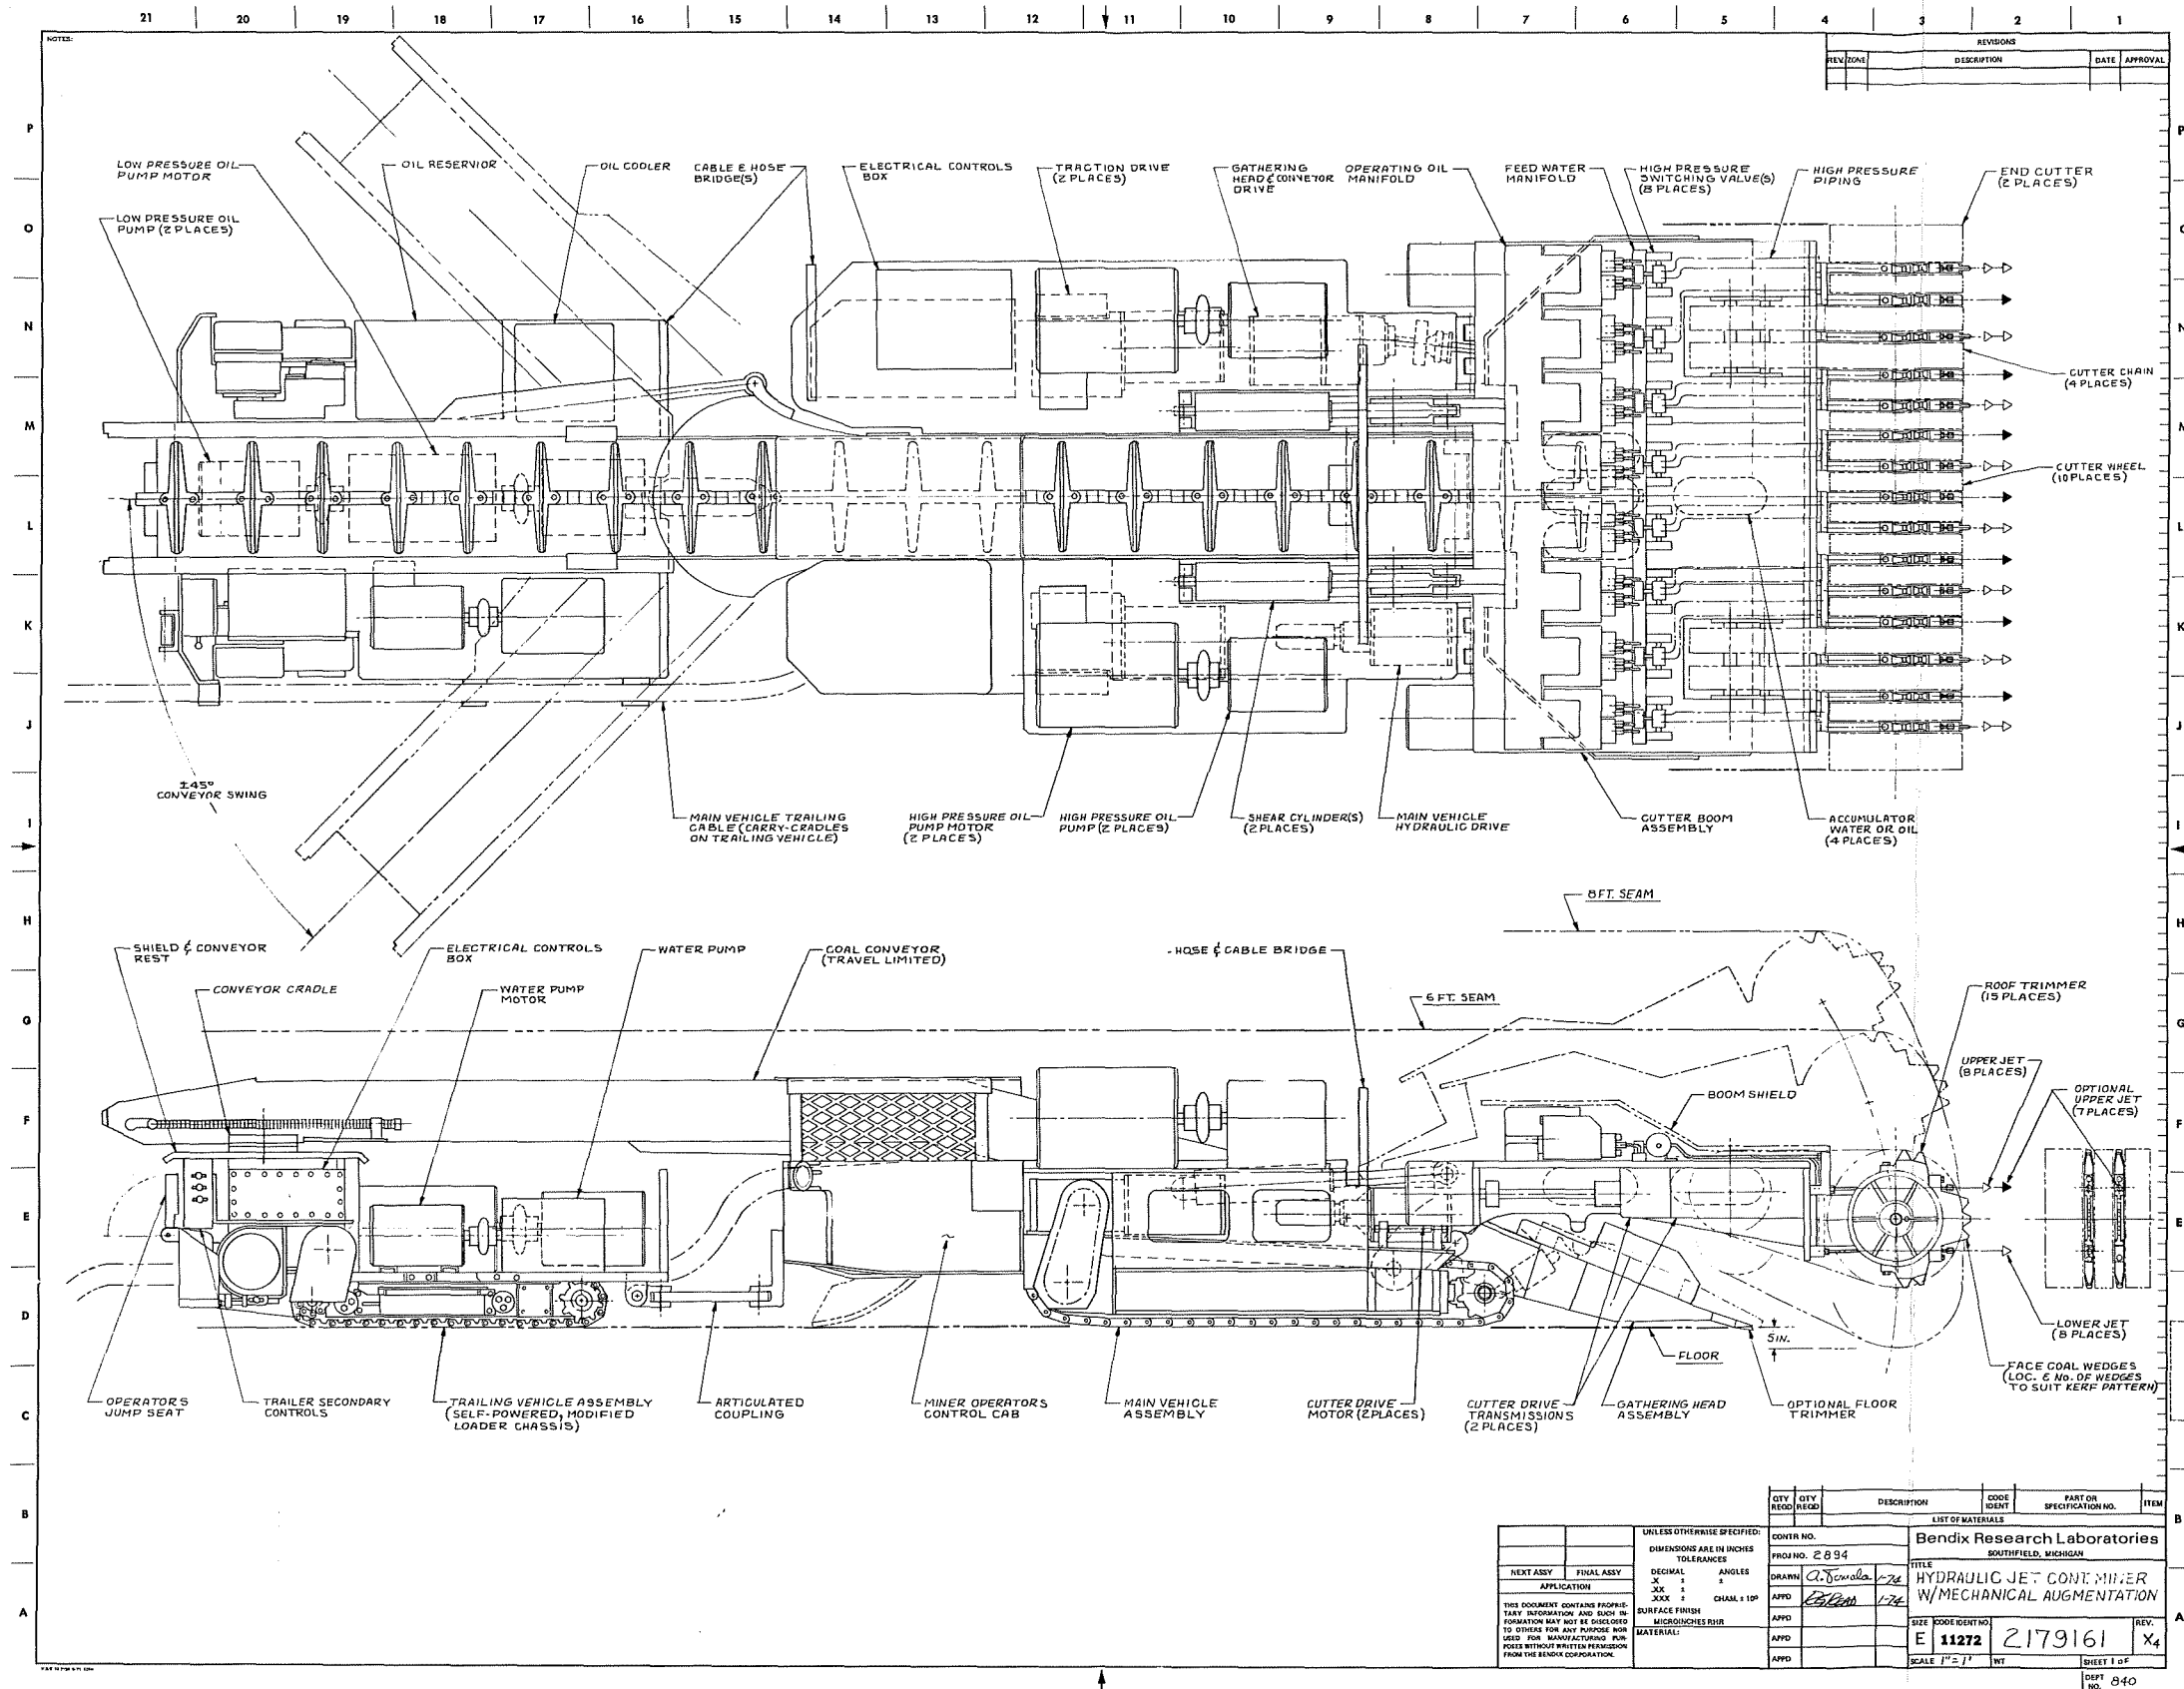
Layout Drawing of Hydraulic-Jet Coal Miner
